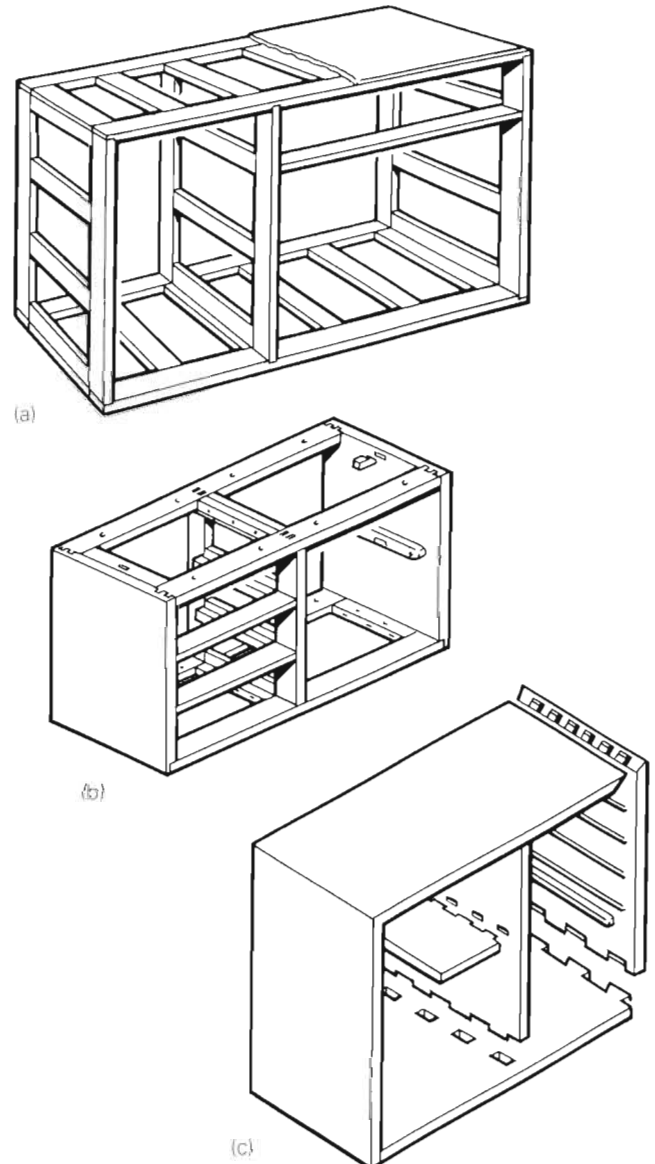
Forms of carcass construction: (a) framed carcass, (b) solid ends carcass, (c) solid carcass.
